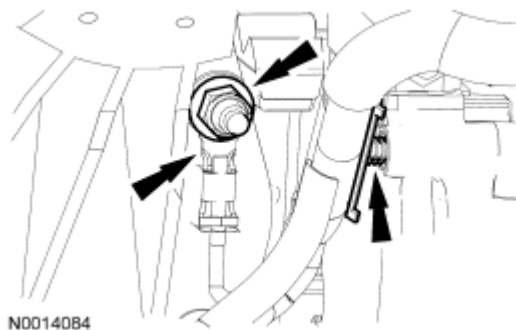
Detaching Nut And Ground Wire From Stud Bolt
